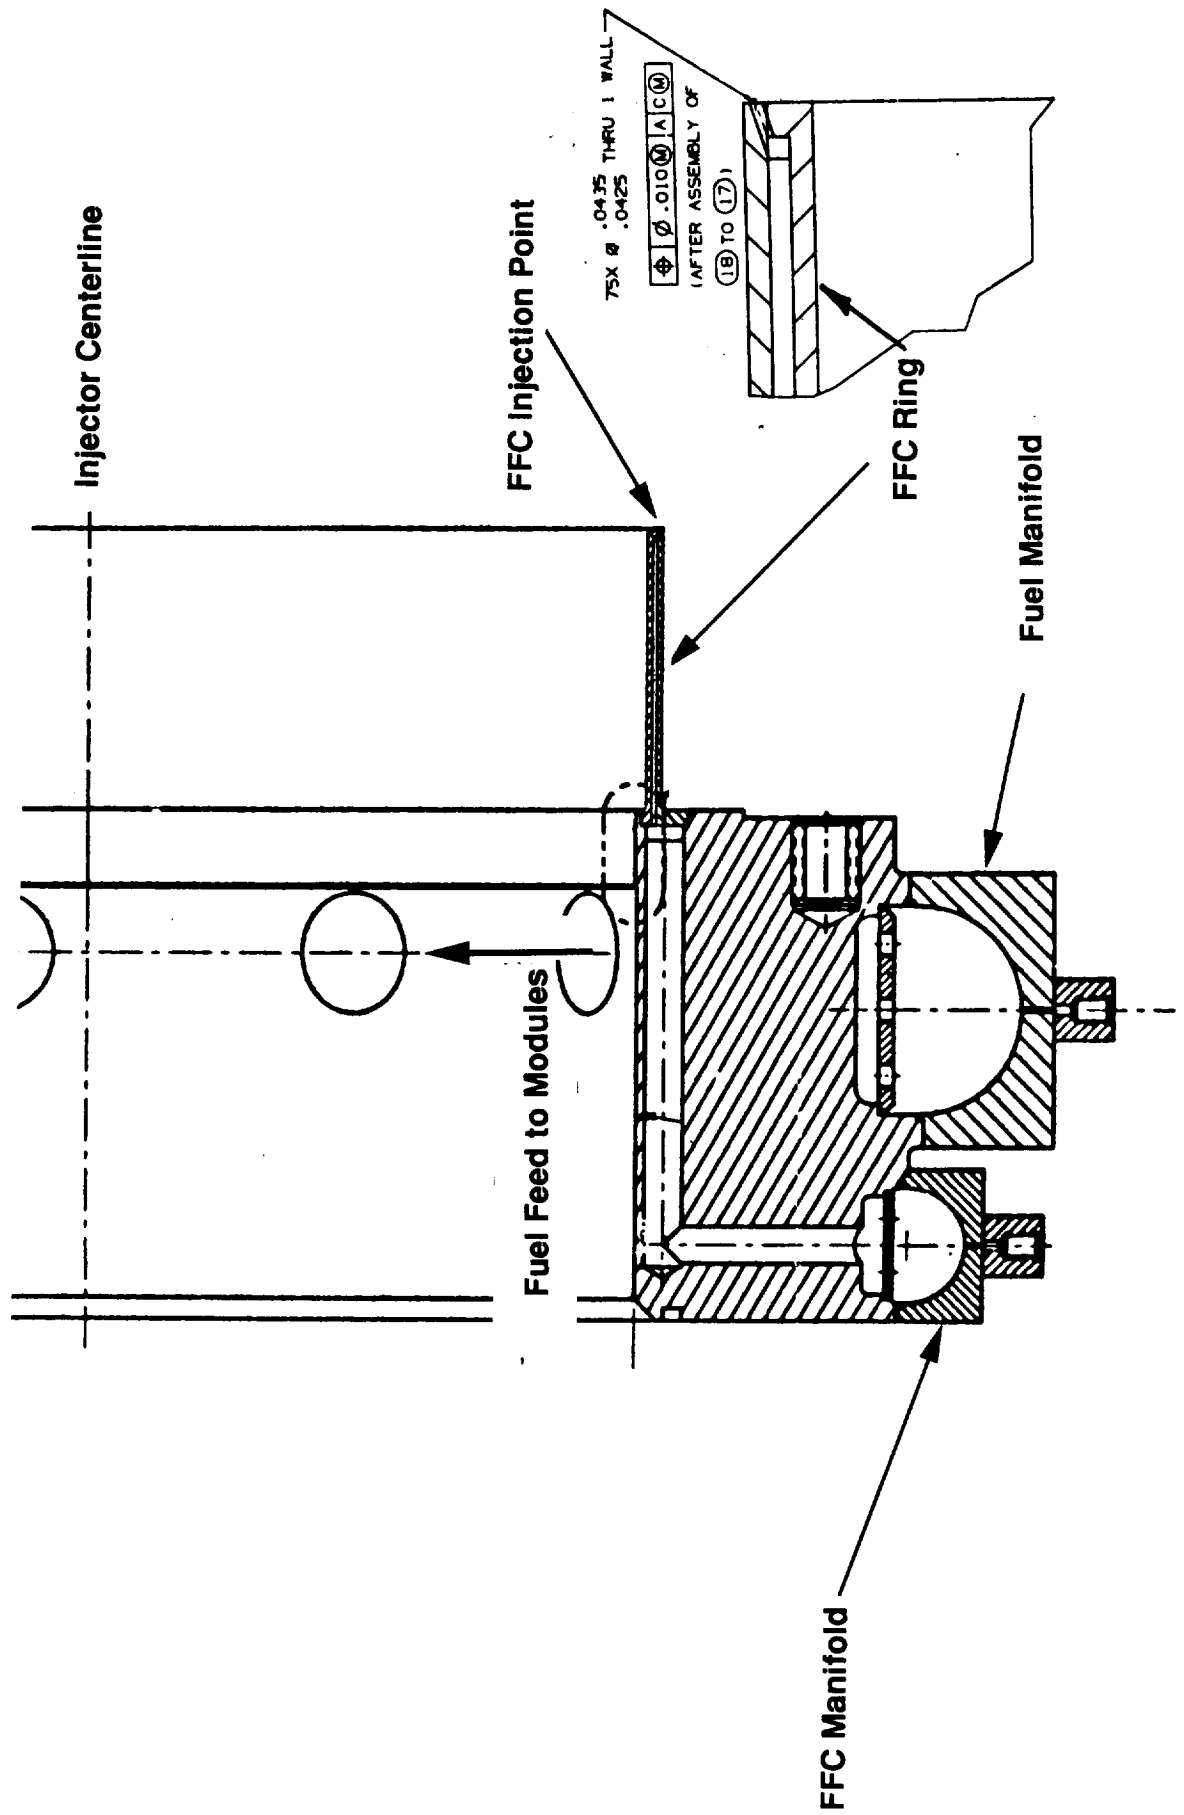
FFC Ring Injects Coolant to Injector Face
